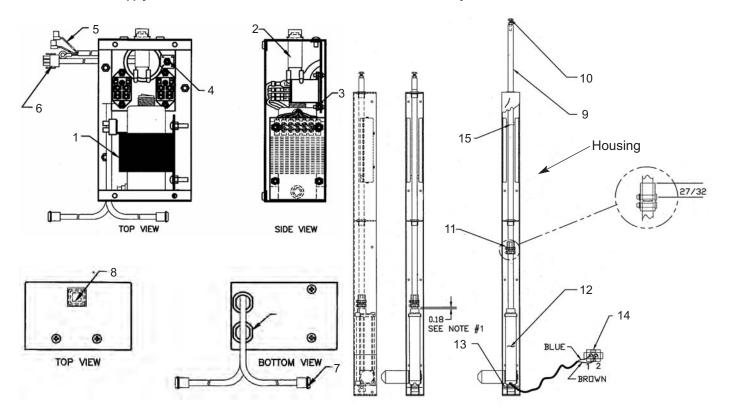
IFM Burner Assembly (Right Side Shown)
